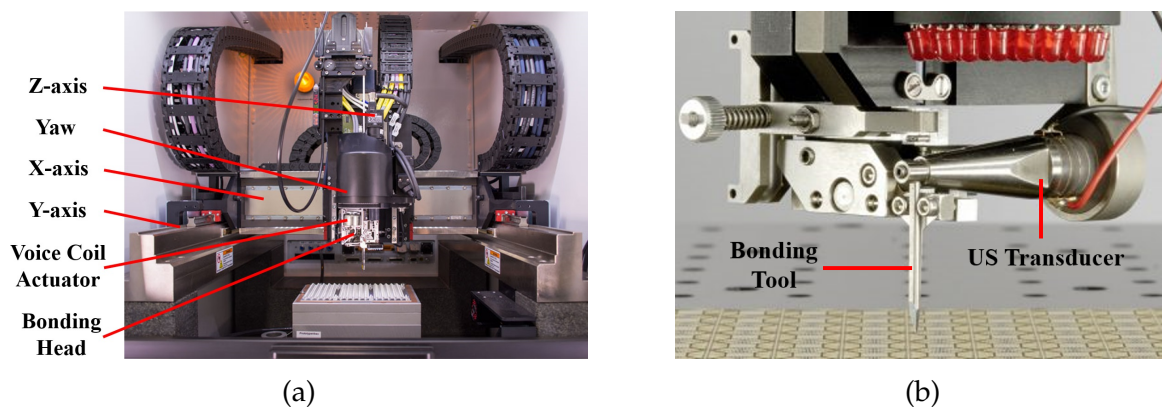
(a) A modern bonding machine and (b) a bonding head [16]
